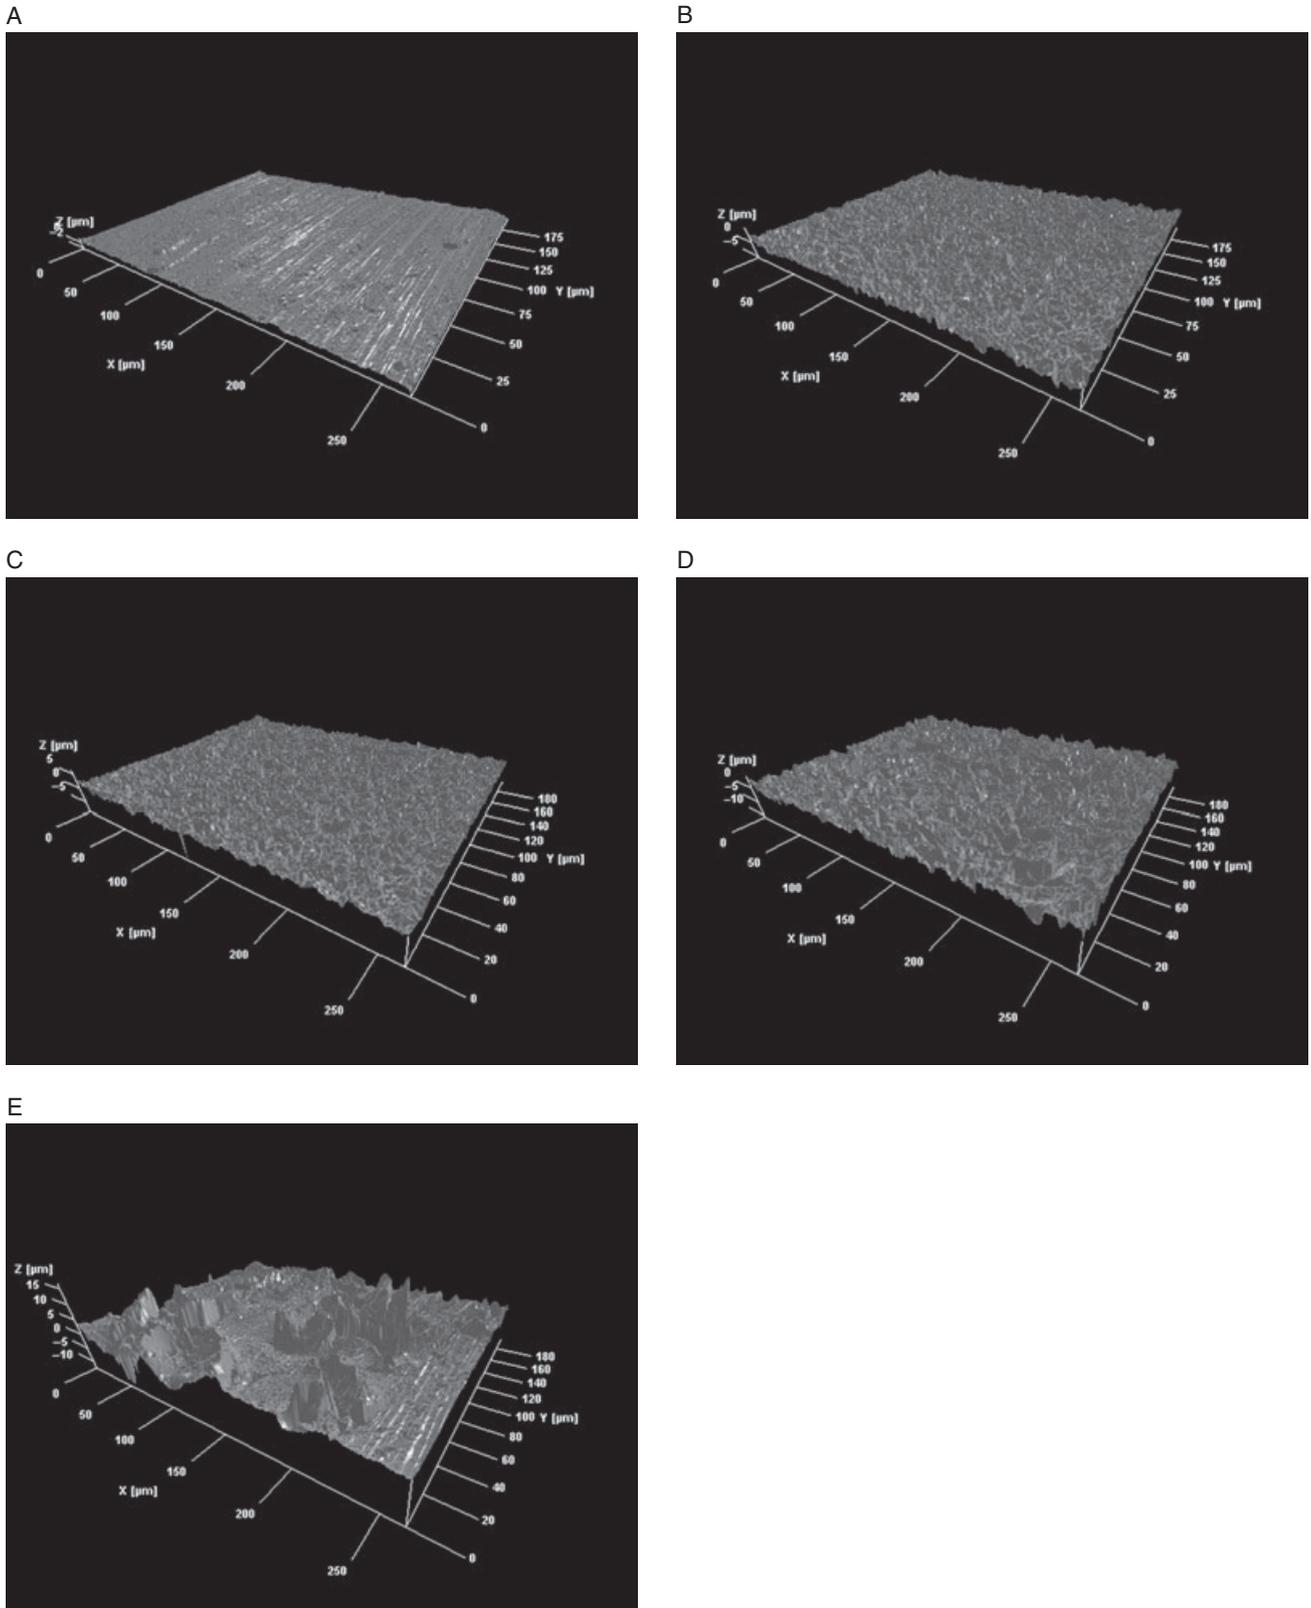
Topographical images of flank thread areas of (A) a turned fixture, (B) a fixture blasted with 25- μm TiO_2 particles, (C) a fixture blasted with 25- μm Al_2O_3 particles, (D) a fixture blasted with 75- μm Al_2O_3 particles, and (E) a fixture blasted with 250- μm Al_2O_3 particles.
